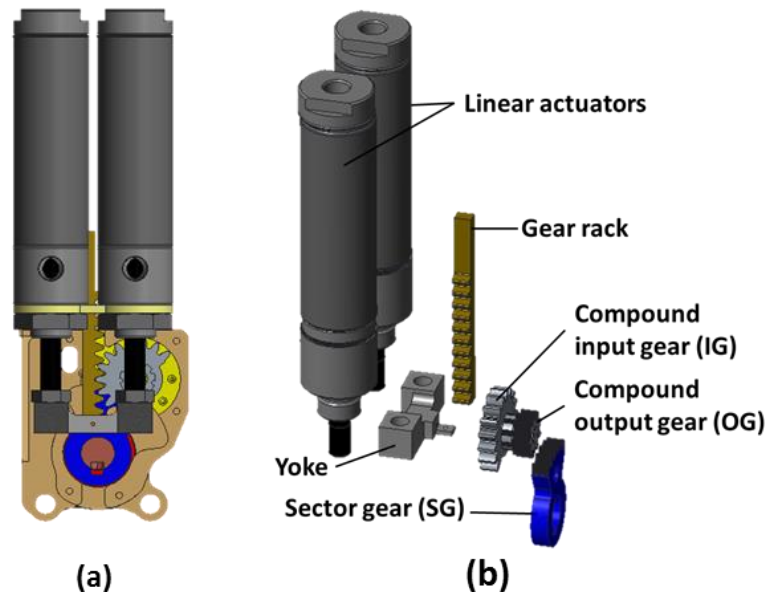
ASSEMBLY VIEW (a) AND EXPLODED VIEW (b) OF THE GEN 3.0 PPAFO'S ACTUATION SYSTEM
